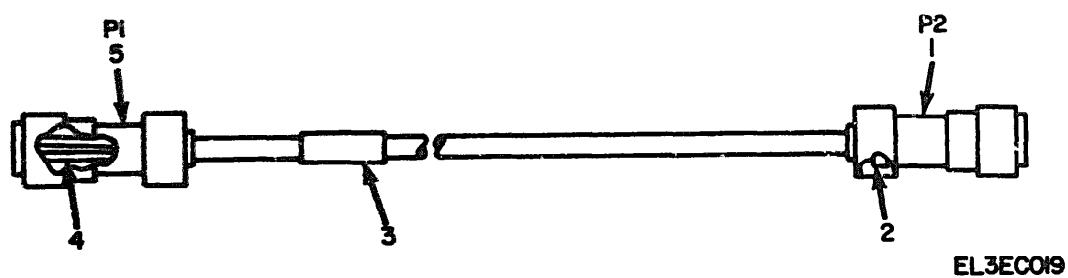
Cable Assembly, Special Purpose LM-114A (A1W2)
